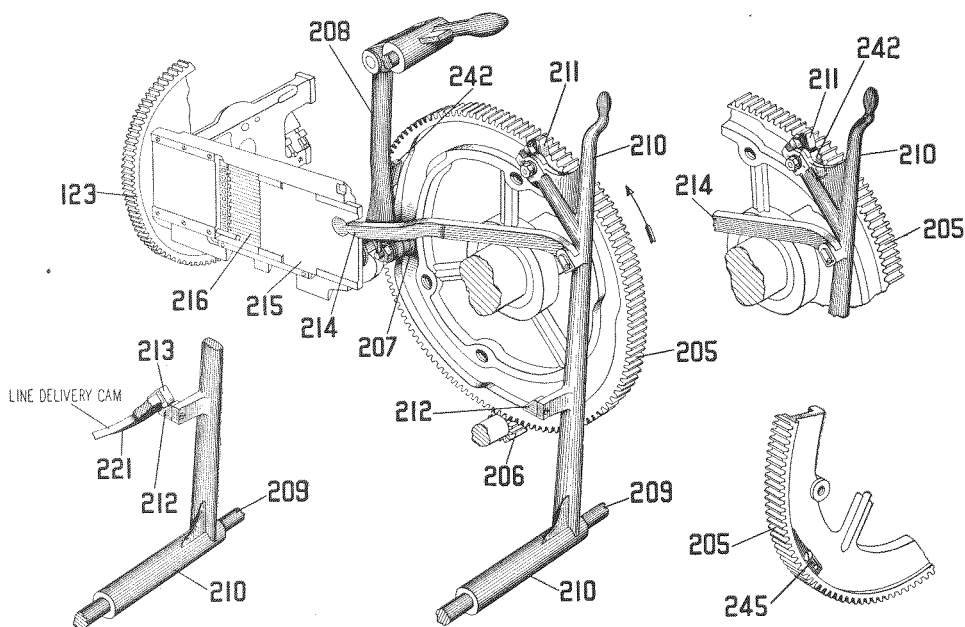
View showing the ejector lever and the cam which operates it, together with the large gear meshing with the pinion on the jack shaft. This gear causes the revolution of the main cam shaft.
